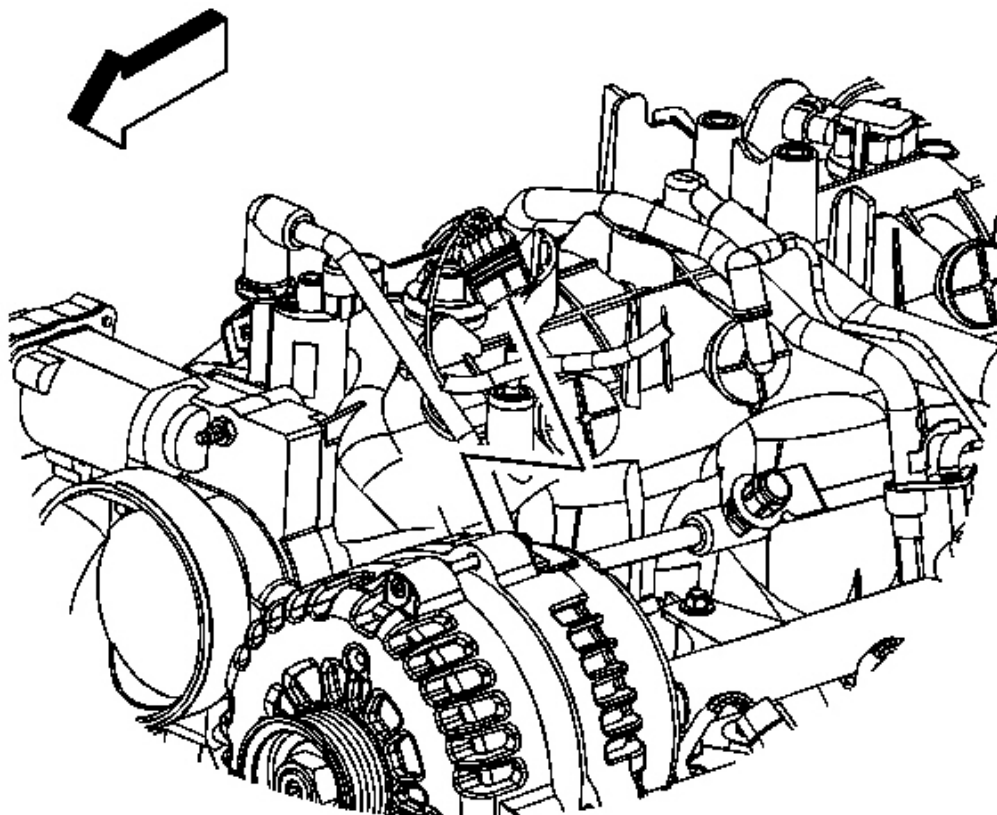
View Of Engine Wiring Harness Generator Electrical Connector
